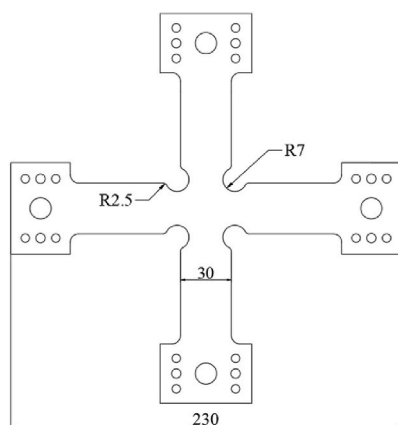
Dimensions of the cruciform specimen for Yld2000-3d calibration (unit: mm).
